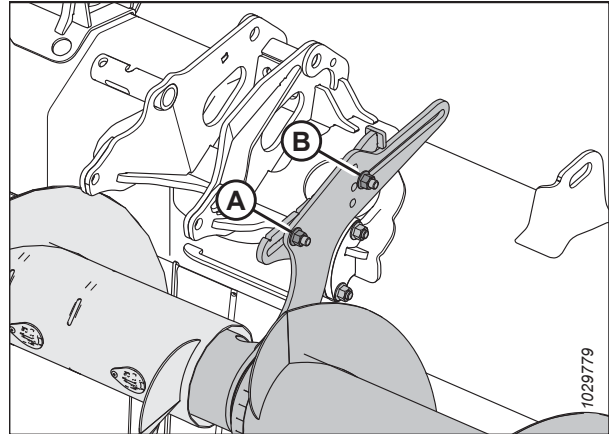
Initial Position of Adjustable Mounts – Three-Piece Auger
